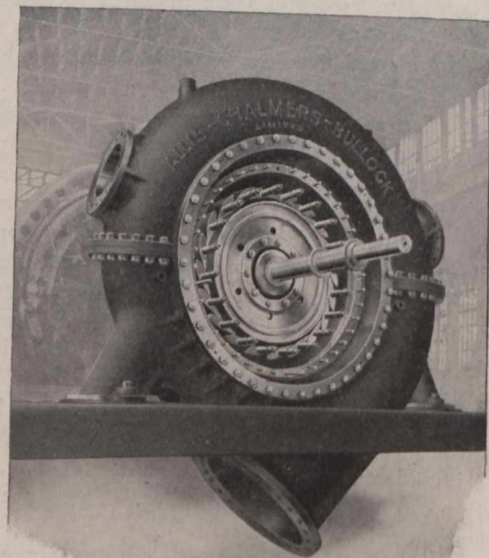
Guide Vanes and Runner in Position Within the Casing.
